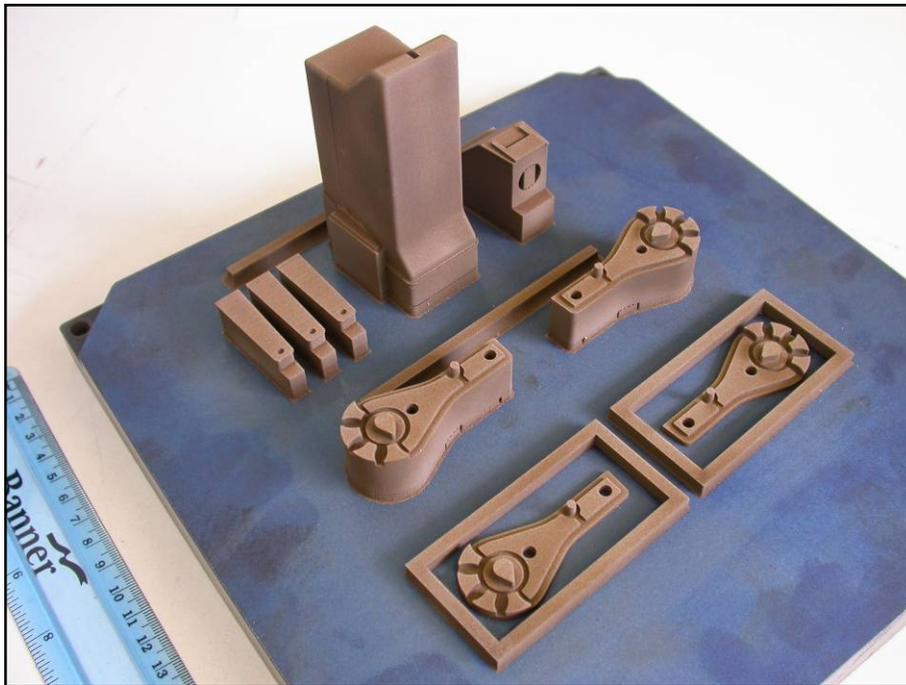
Mould tool inserts for an electronic housing as produced by the powder bed DMLS process in EOS DirectMetal 20, shown on the steel build platform.
